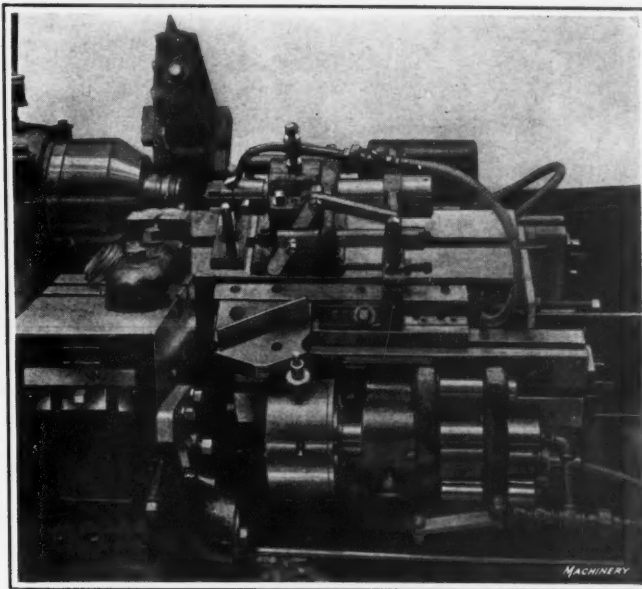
Collapsing Tap Fixture in Operation on Gridley Turret Lathe
